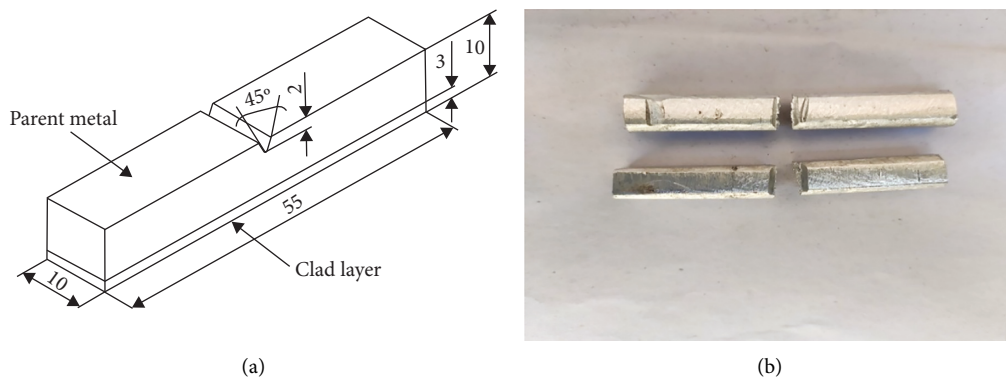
(a) Specimen according to the ASTM standard. (b) Tested specimen.
